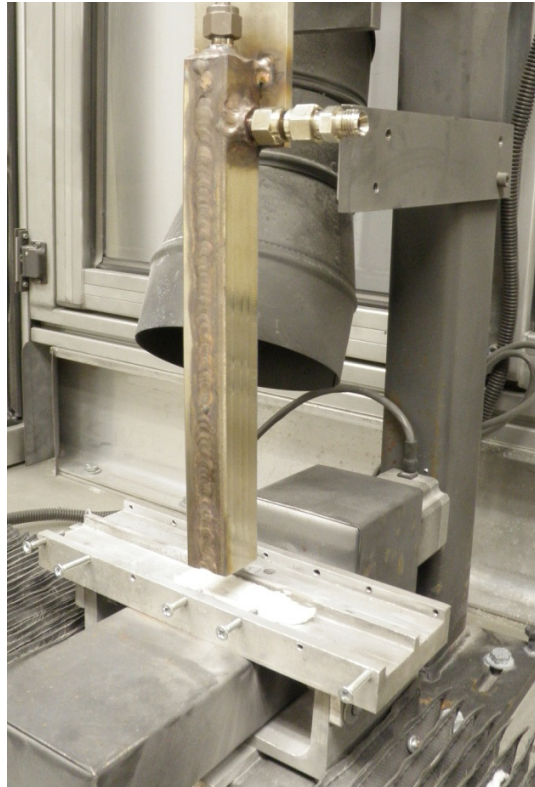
View of the fully assembled CGDS nozzle in the University of Ottawa cold spray system.
